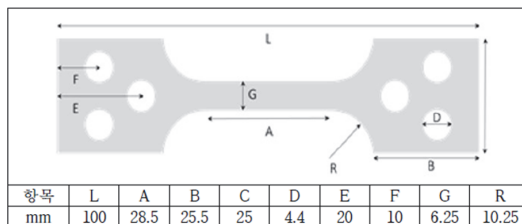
Photographs showing the shape and dimensions of the samples used in the tensile test
